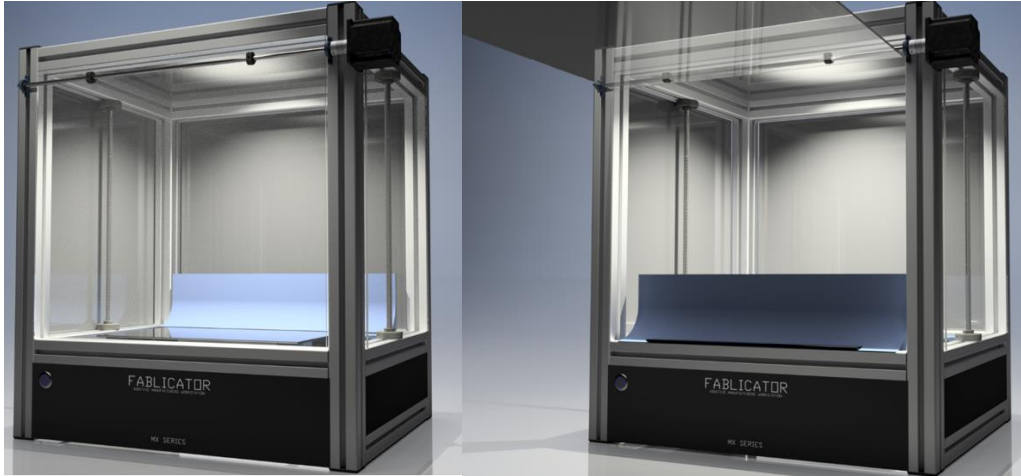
Fablicator Full Automation Mechanism - Door Closed, Part Remover Home, Door Open, Part Remover Forward.
